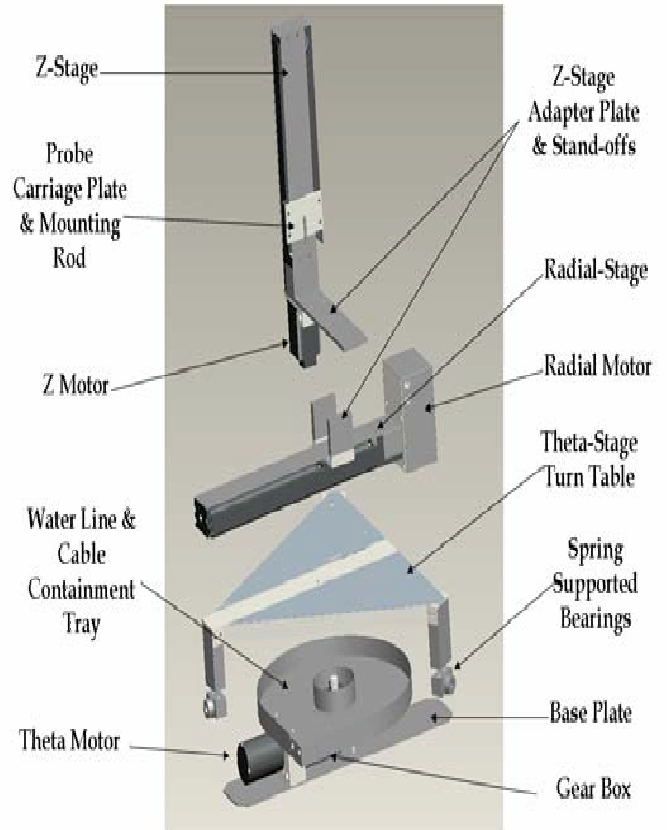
Mechanical design of the system. Three stepper motors are used to position a Faraday probe in a three dimensional space.
